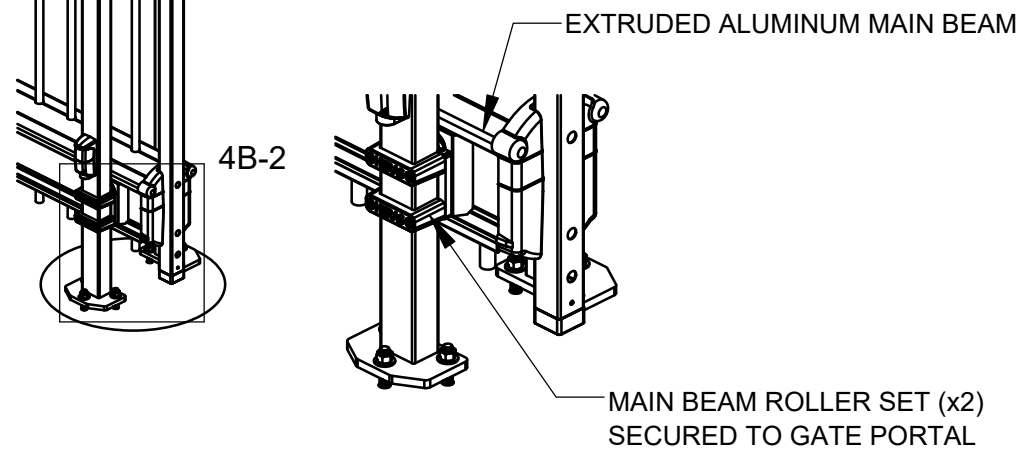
B - PANEL MAIN ROLLER / TOP GUIDE ROLLER DETAILS
